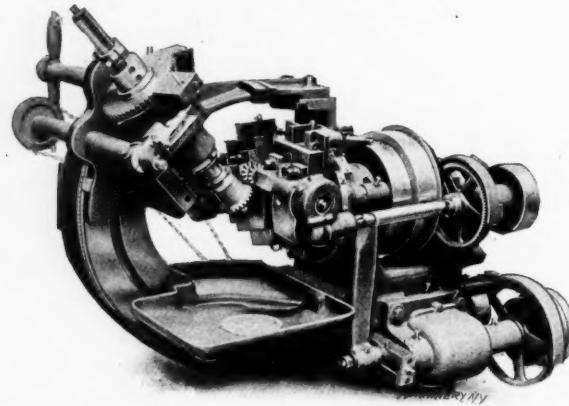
The Working Side of the Warren Machine showing the Milling Cutters whose Plane Surfaces represent Sides of Adjacent Crown Gear Teeth.
